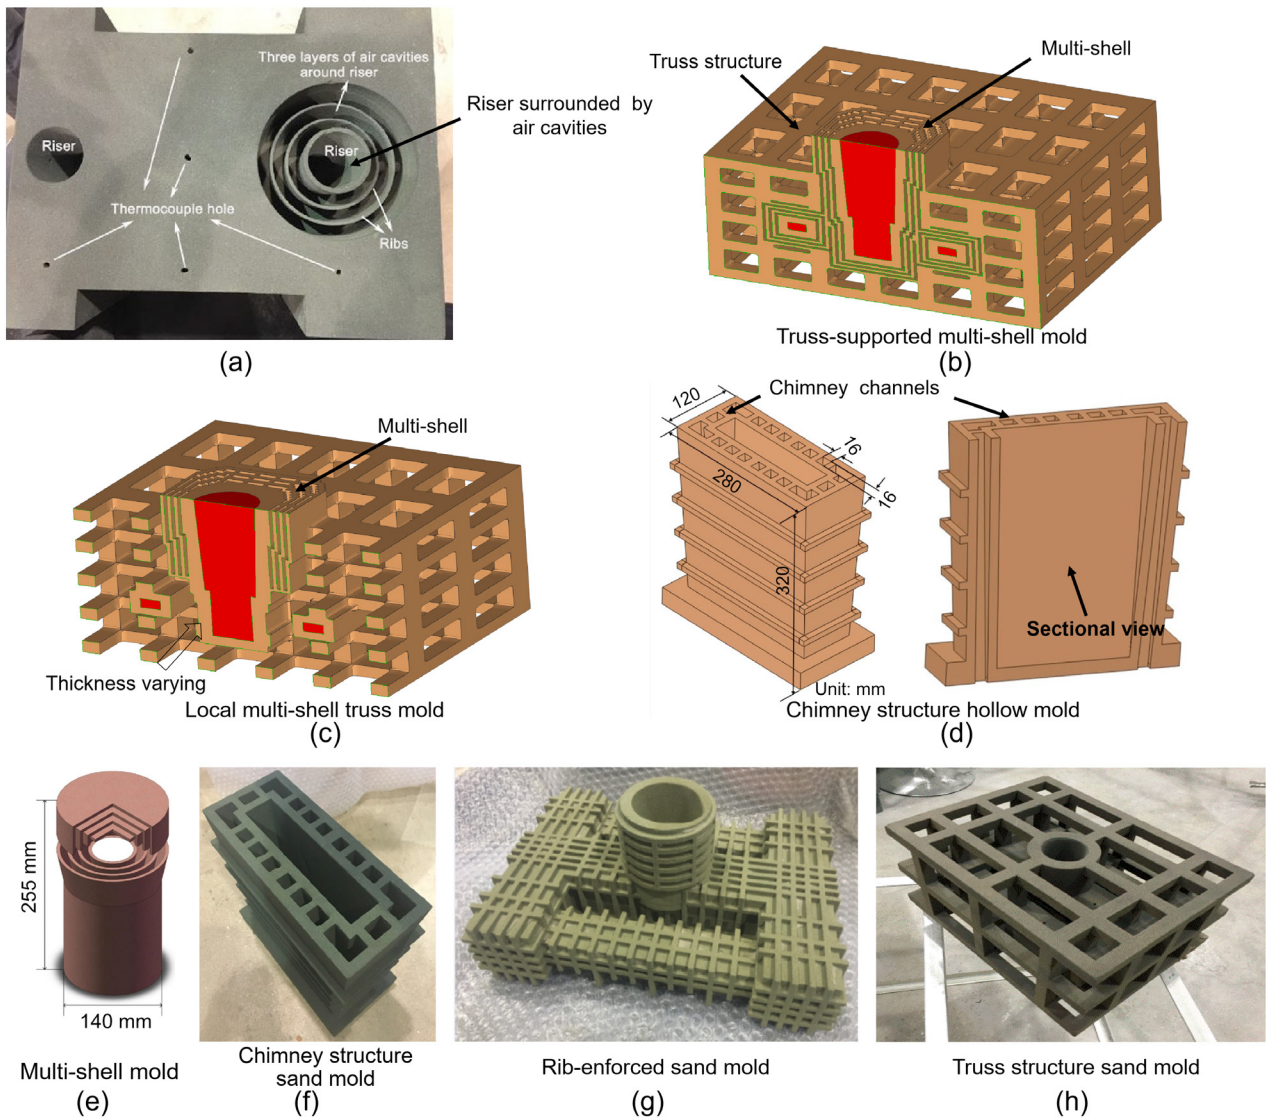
Intelligent mold structures probably used in future intelligent casting process: (a) sand mold with riser surrounded by air cavities^[35]; (b)–(e) CAD model of hollow mold structure^[37–39]; (f)–(h) hollow sand mold^[39–41]
